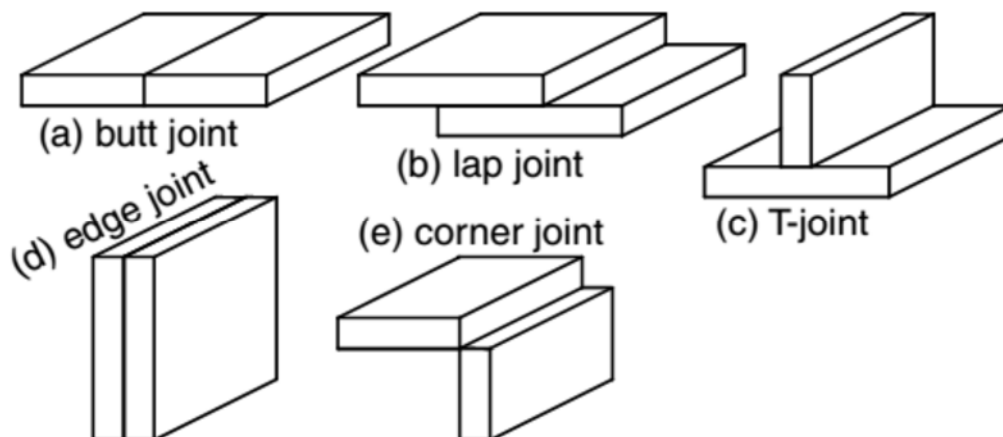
5 basic types of welding joints^[24]
